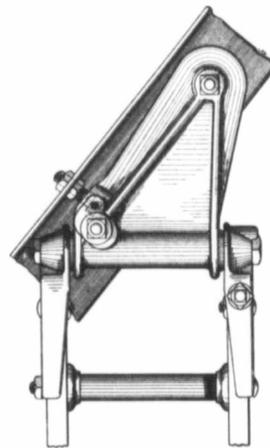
Casting to connect frame and beam, with anchor bolt to admit bottoms for parallelism.
